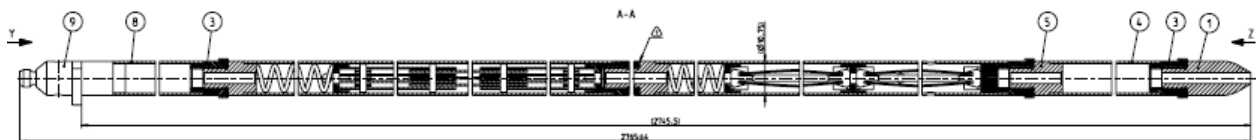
Layout of a IMAGO Material Test Rod irradiated since 2016 in Gösgen. Different samples are mounted inside the MTR and placed within a guide thimble tube for irradiated in a heavy duty fuel assembly. Bended and damaged samples are also included for future characterisation.
